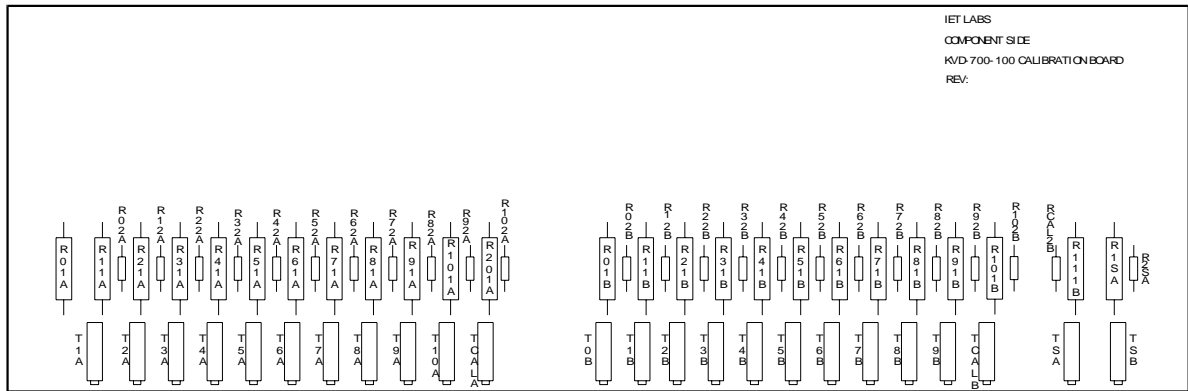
Replacement Parts List: Top View of Calibration PC Board
